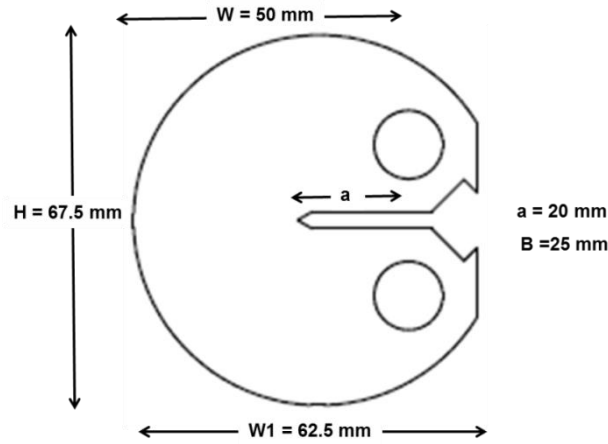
A schematic drawing of a 25 mm thick disc shape CT specimen
